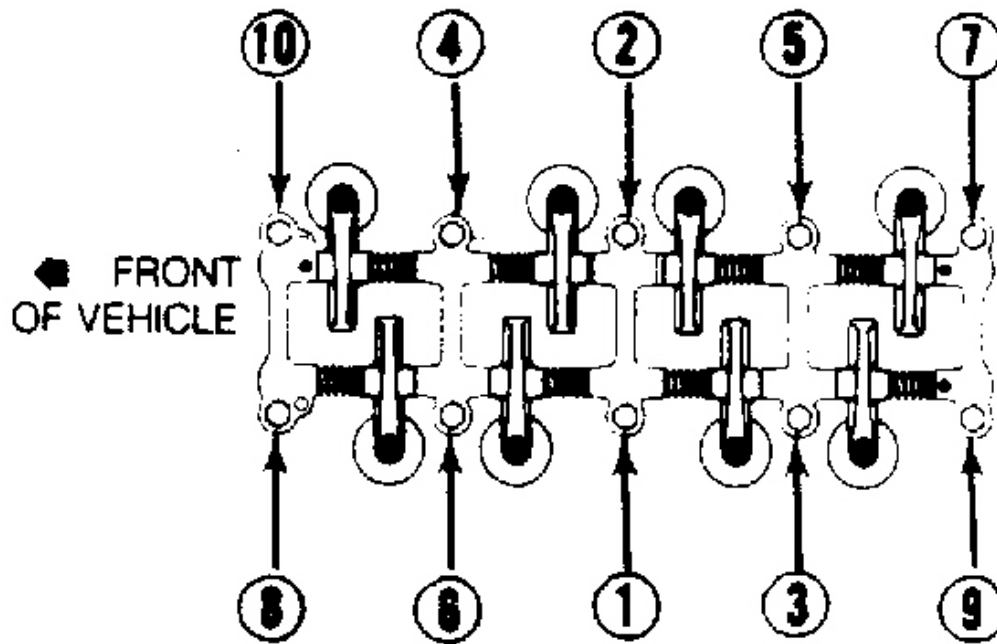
Cylinder Head/Rocker Arm Bolt Tightening Sequence
